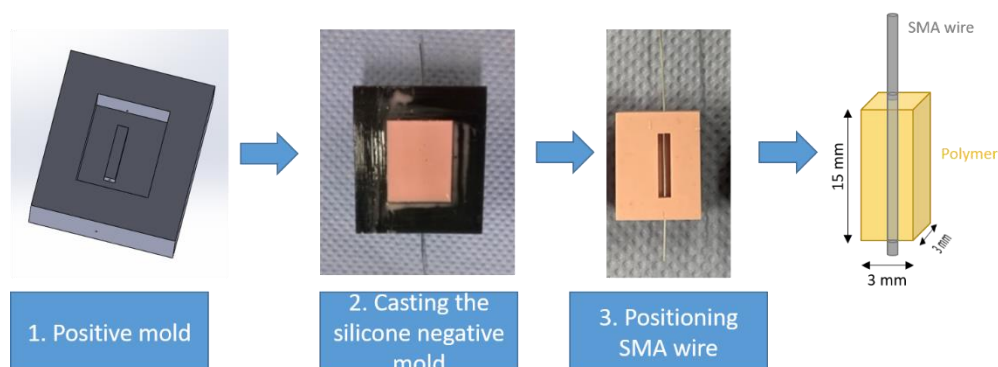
Showing the *in situ* pull-out sample preparation process, starting with printing the positive mold (1), using this mold for casting a negative silicone mold (2), next step was positioning the cleaned and heat-treated SMA wire in the silicone mold the epoxy polymer matrix is filled in, after curing as described in section 2.2 a pull-out sample can be demolded as schematic demonstrated (right). [160]
